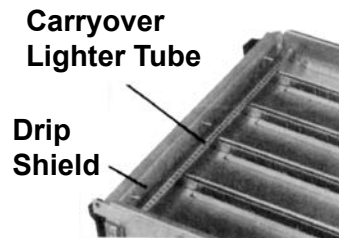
B - Remove the flash carryover and install the Carryover Lighter Tube and Drip Shield
